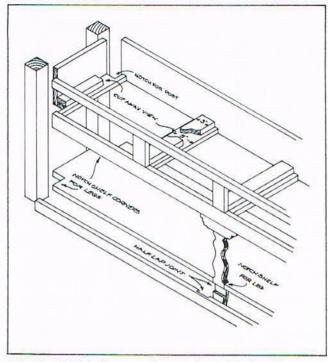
B - Welsh Dresser: Carcase Assembly Detail.
